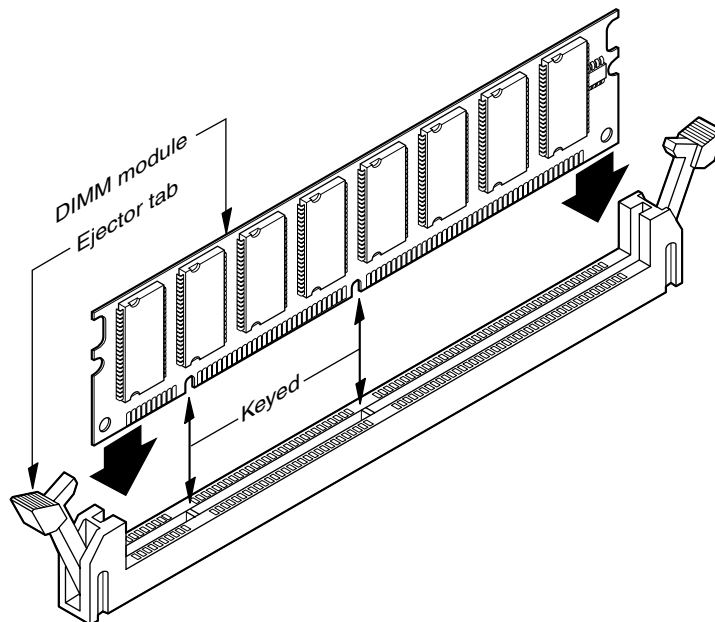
DIMM keys match the protrusions in the DIMM sockets. DDR DIMM and RIMM keys are similar but not exactly the same.
